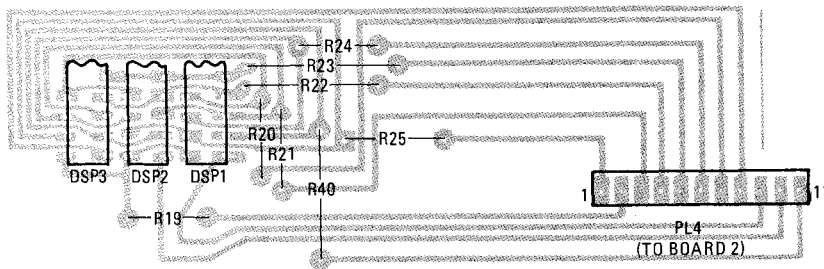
THE DISPLAY BOARD mounts directly on Board 1 using a right-angled male header, PL4.
